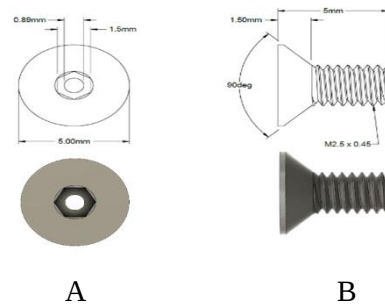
Technical drawing of first screw (A) top view (B) side view.
